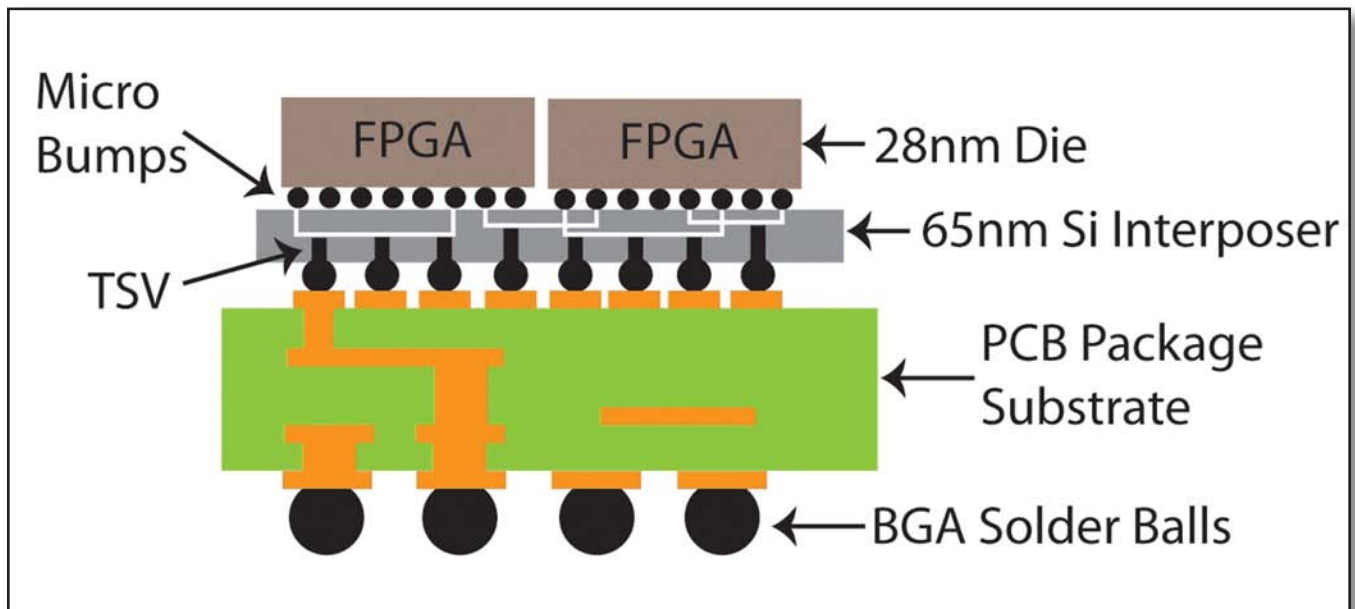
A BGA cross-section showing the dies, silicon interposer and PCB substrate stack.
